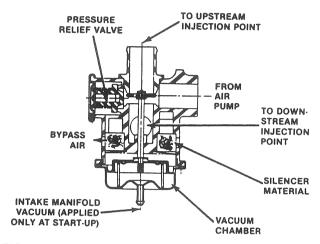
Design of the air switching and relief valves. (Courtesy of Chrysler Motors Corp.)
